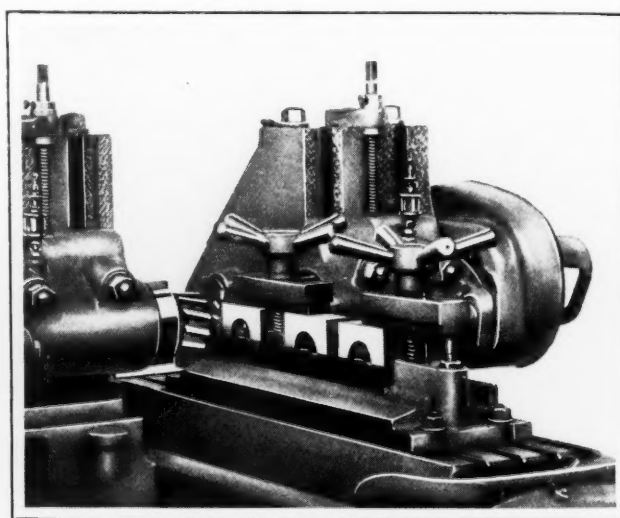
Milling the Ends of Cast-iron Bearing Caps
